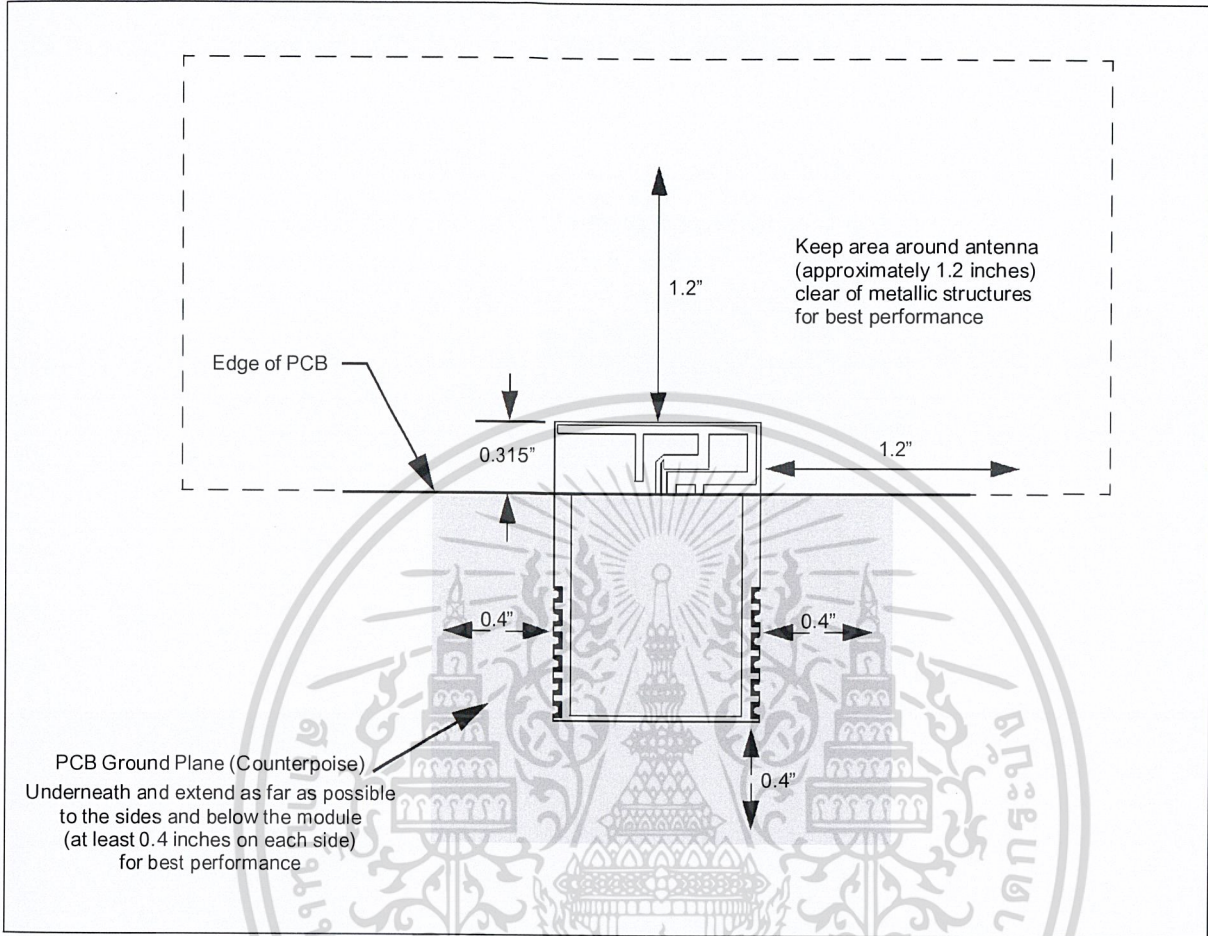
RECOMMENDED PCB FOOTPRINT
